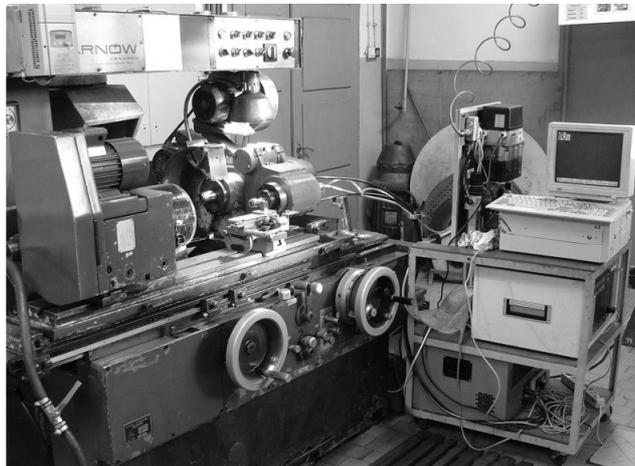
Investigative position – RUP 28P grinding machine with EV-70/70-2WB spindle
